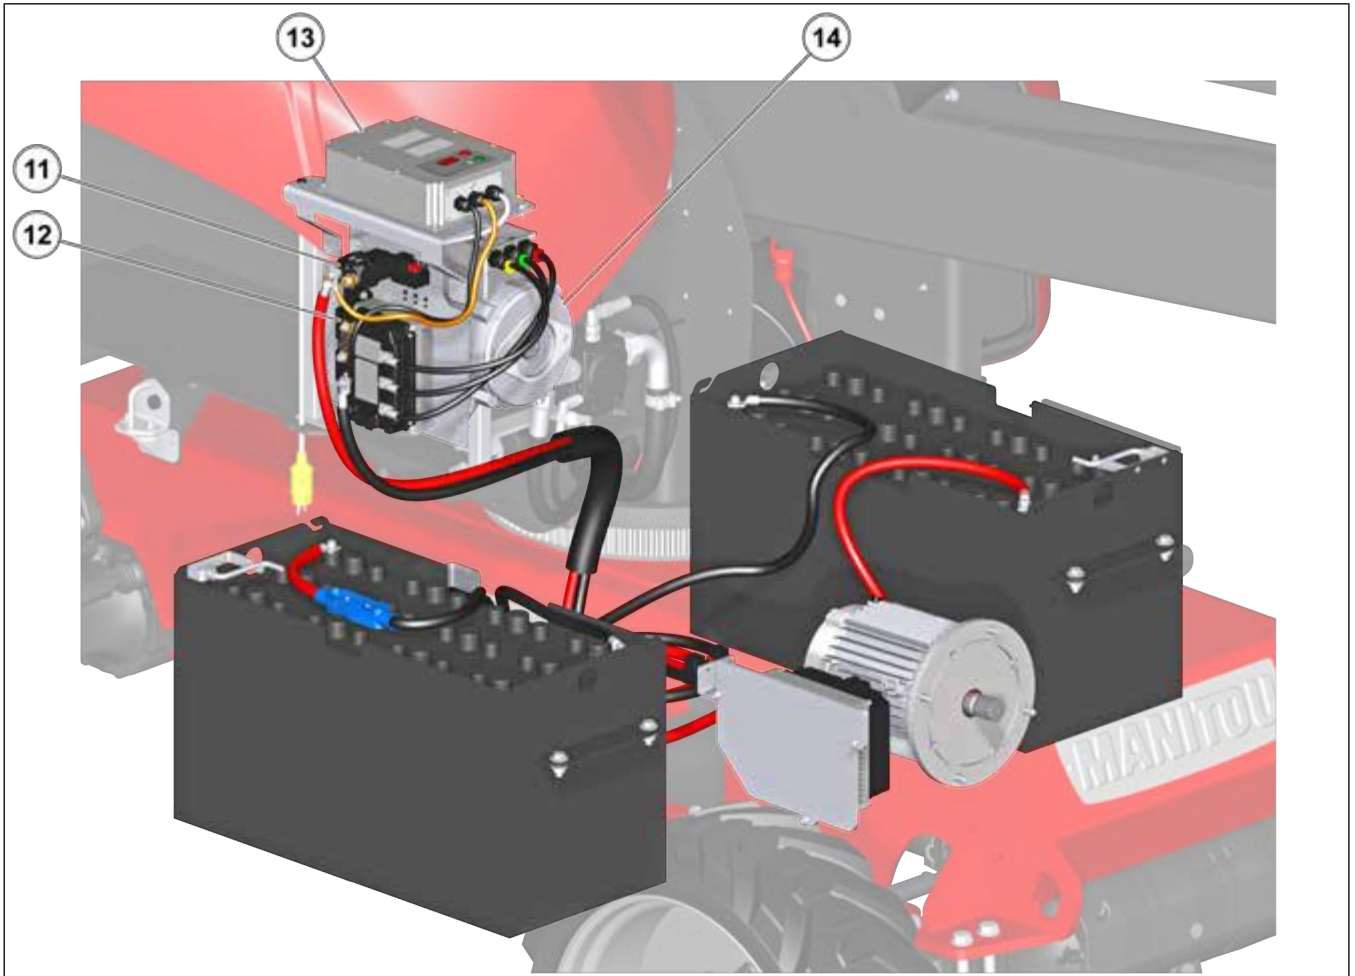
Checking cables and high-voltage electrical connections 3 - up to machine no. MAN00000J01101633
